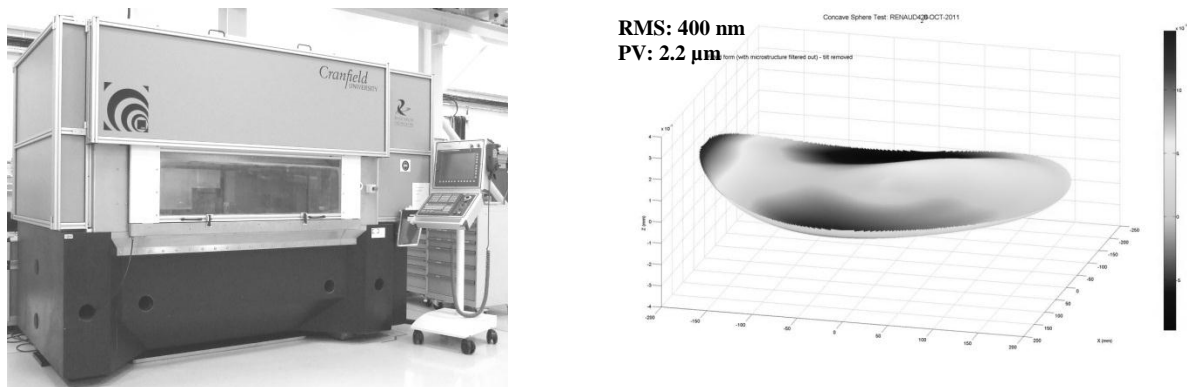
Box machine used for grinding process (left), Surface topography map after grinding (right)
